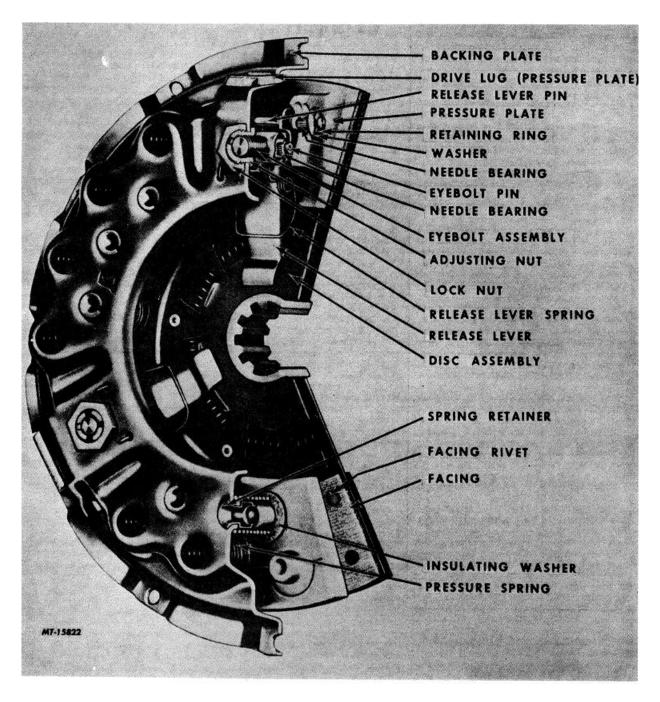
Sectional View of 14" Single Plate Clutch Assembly
